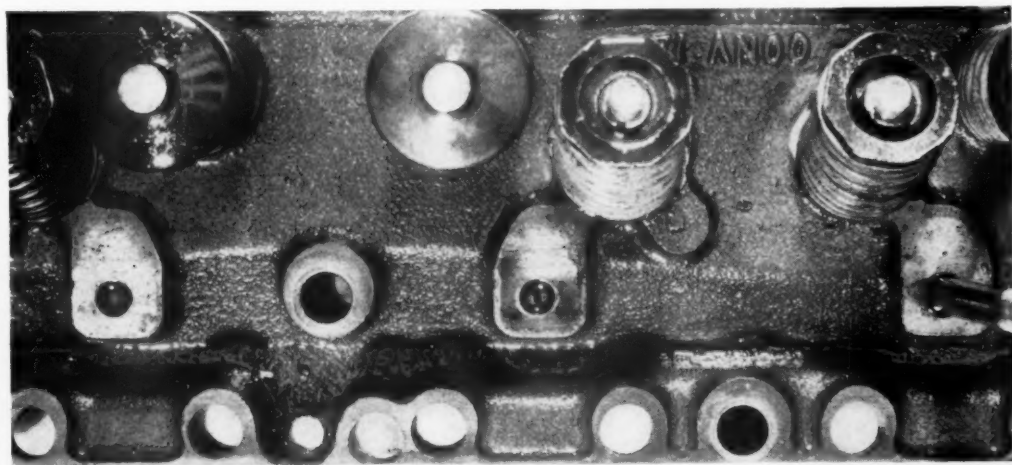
Valve chamber from laboratory engine test run using improved operating conditions.
